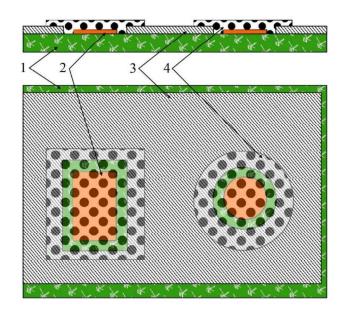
Overprinting footprint: 1- PCB, 2 - pad, 3 - solder mask, 4 - solder paste
